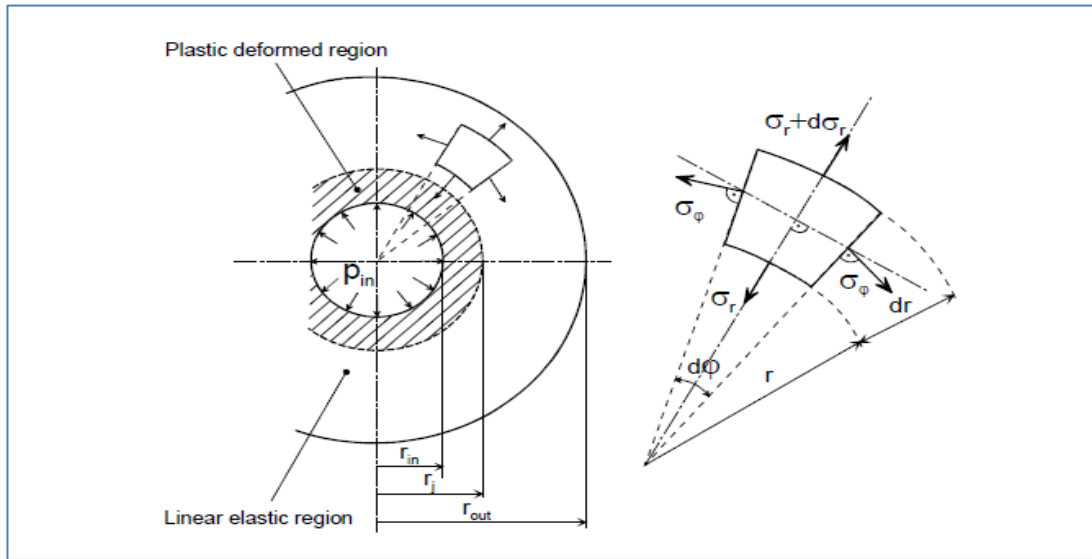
Cross-section of a partially autofrettaged thick-walled tube with static equilibrium of the control element.
